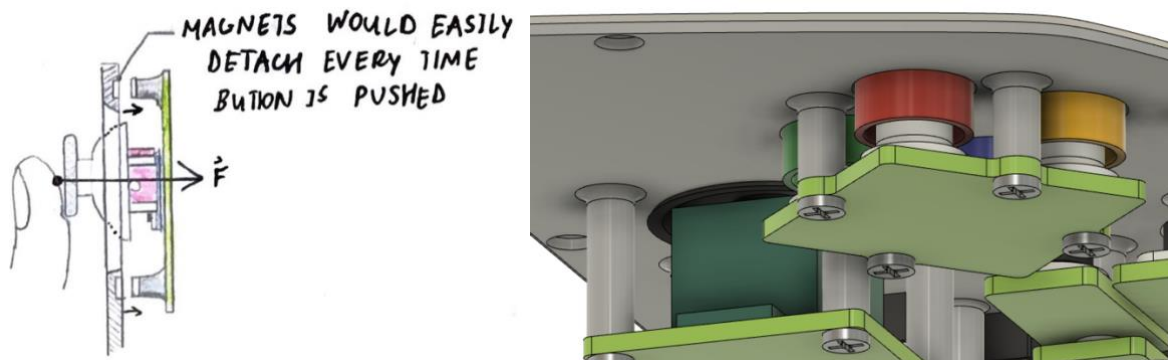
Sketch of magnetic component attachment (left) and final CAD model (right).
